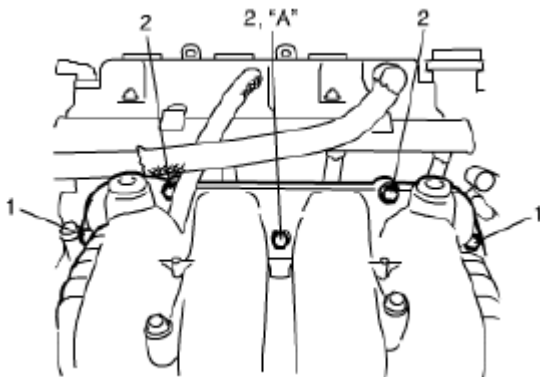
Identifying Intake Manifold Bolts & Nuts
